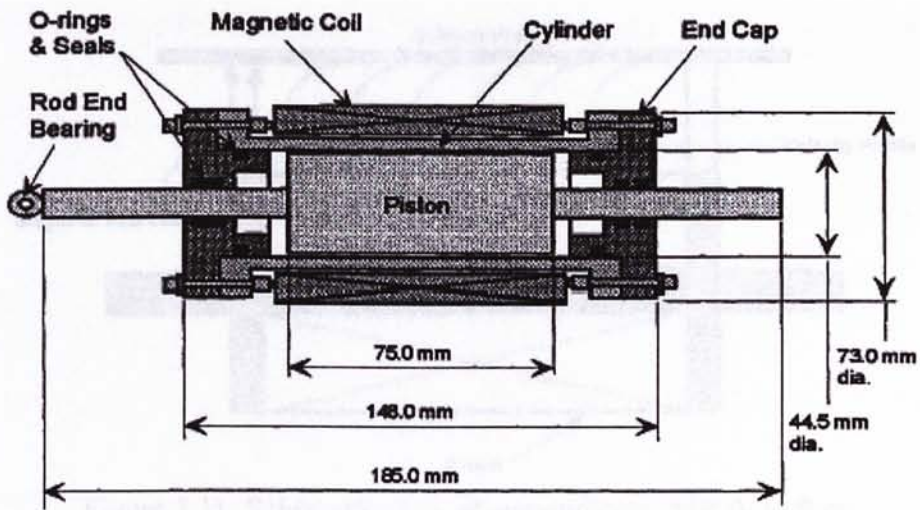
Piston-cylinder arrangement for the coil wrapped around the outer diameter [22].
